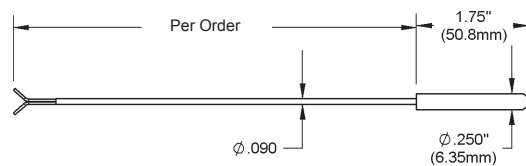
Stainless Steel Remote Probe with FEP Plenum Cable
